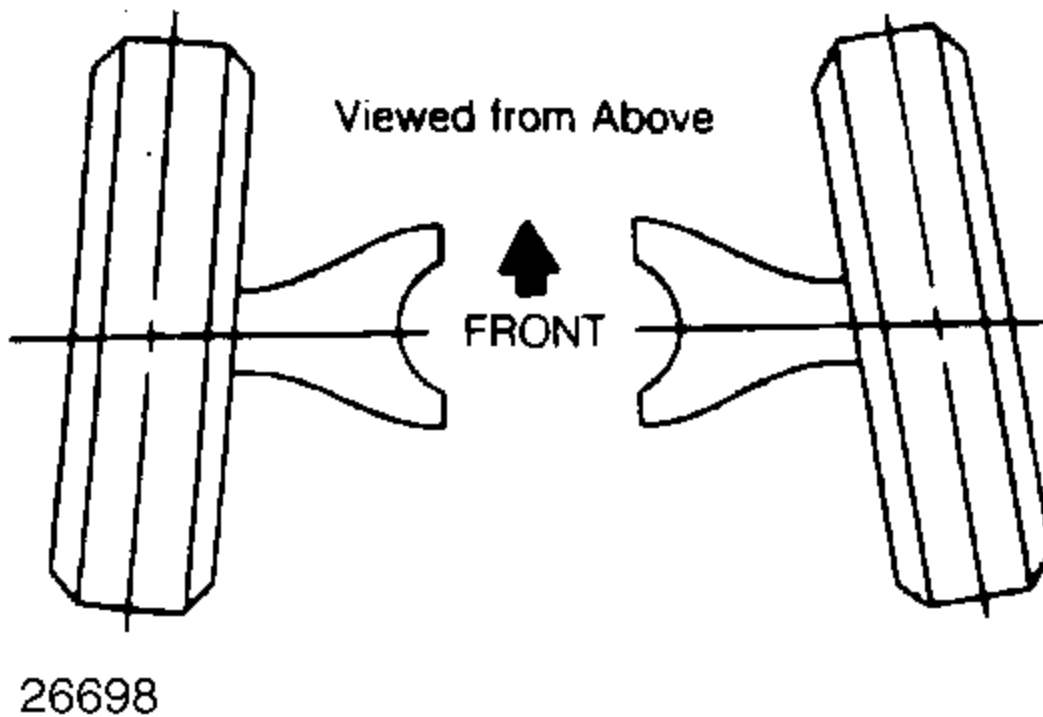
Wheel Toe-In (Dimension A Less Dimension B)
